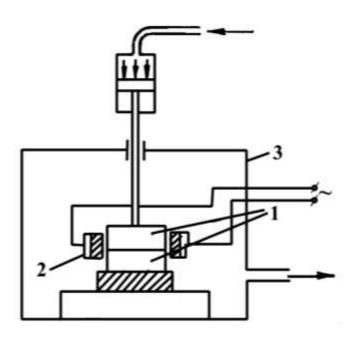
Diffusion welding: 1 – works to be welded; 2 – heater; 3 – vacuum chamber
